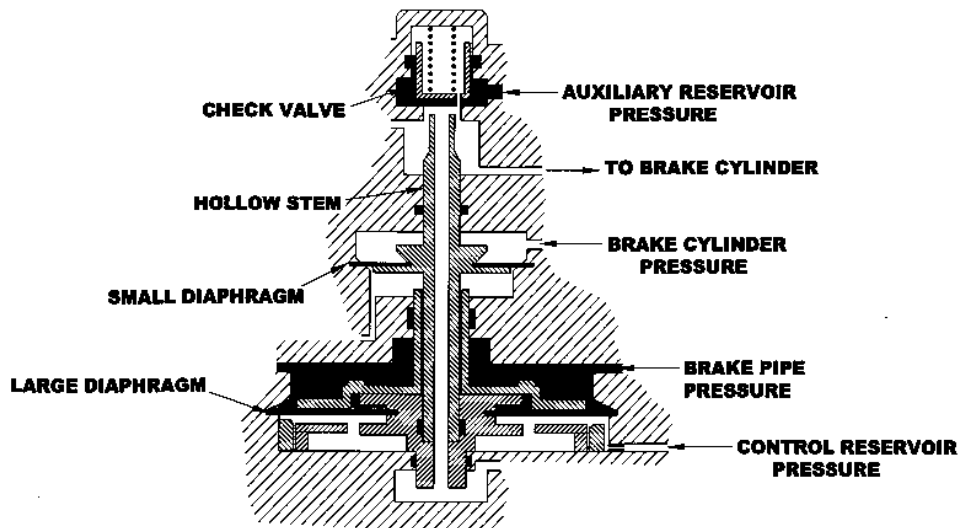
SECTIONAL VIEW OF MAIN VALVE
